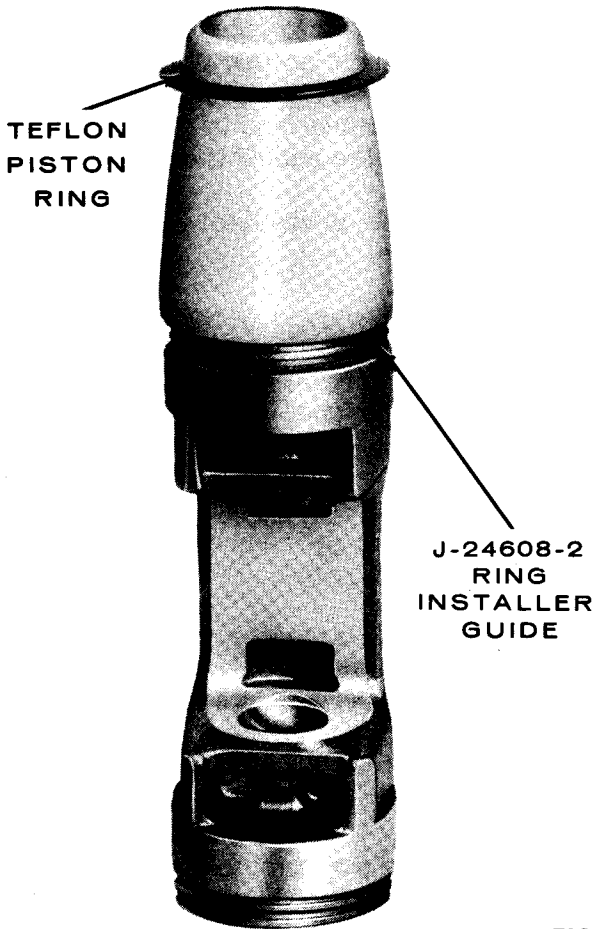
Teflon Piston Ring Positioned On Ring Installer Guide
